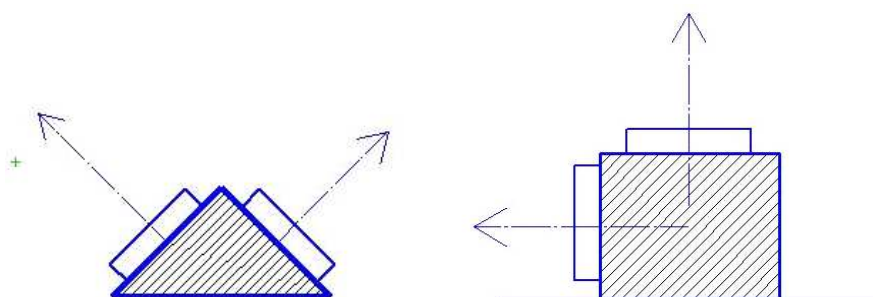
Different types of accelerometer aluminium mounting blocks.
